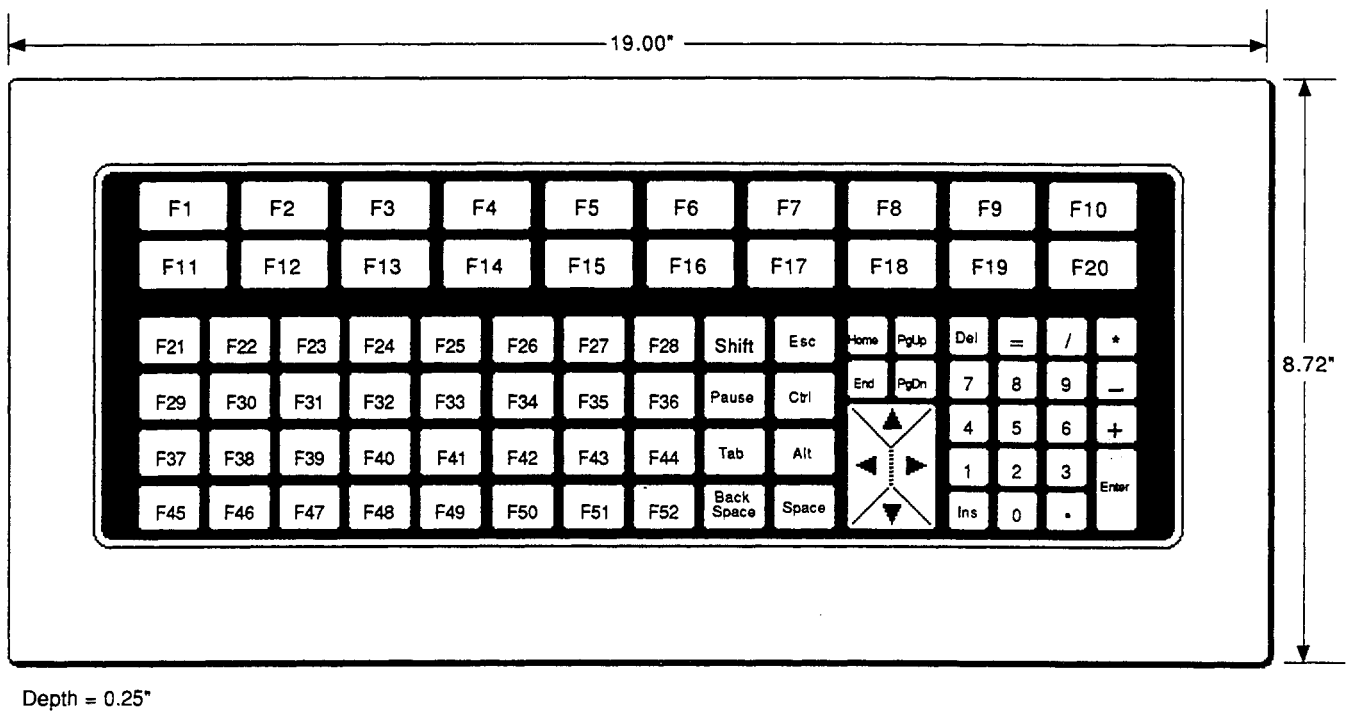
8000-KB6 Keyboard with Dimensions
